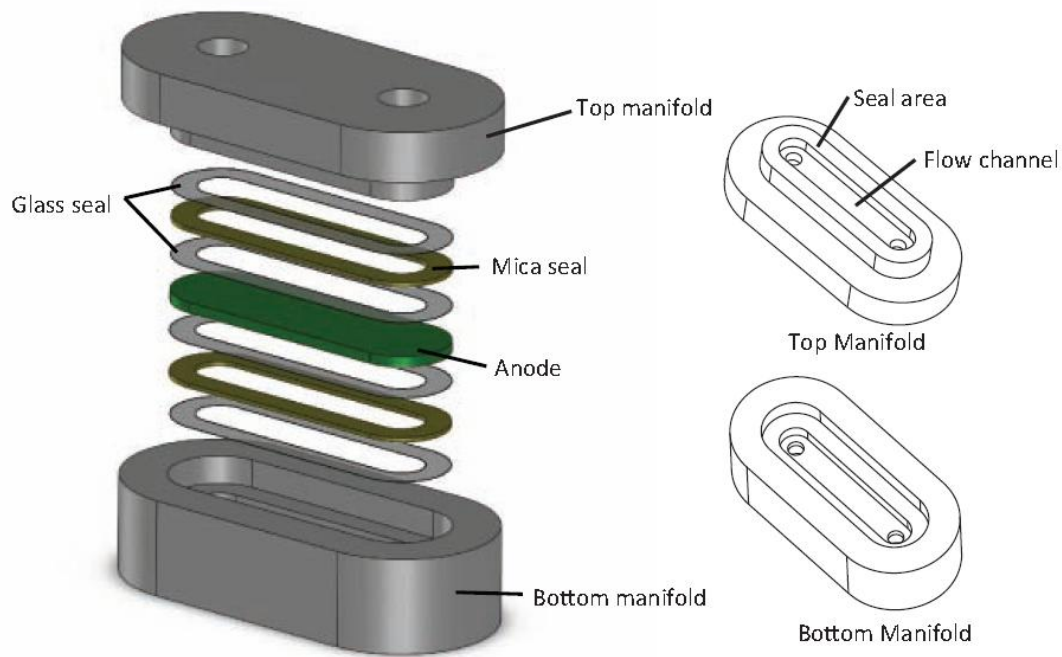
Exploded view of SAE manifold assembly and anode sealing process. Diagram taken from(Richards, 2010)
